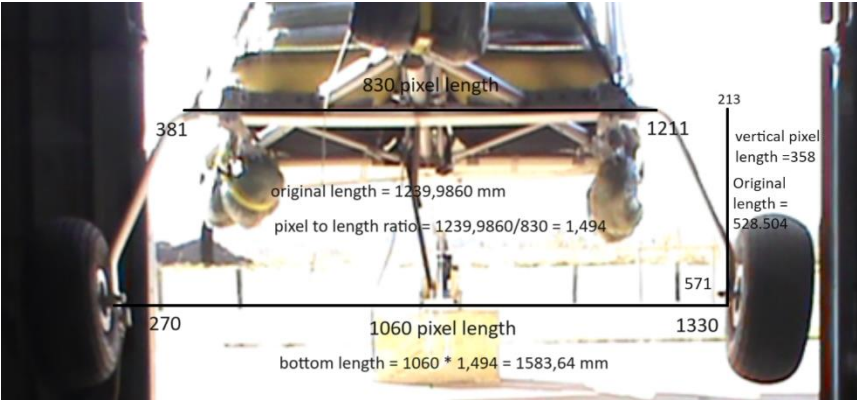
Aluminium 7075T6 Landing Gear Pre-Drop Test (0,3 m at 375 kg)
